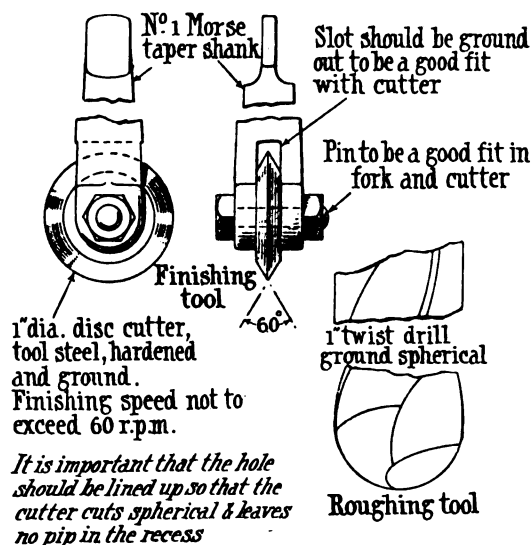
Cutter used to machine spherical recess in specimen in Fig. 5.
